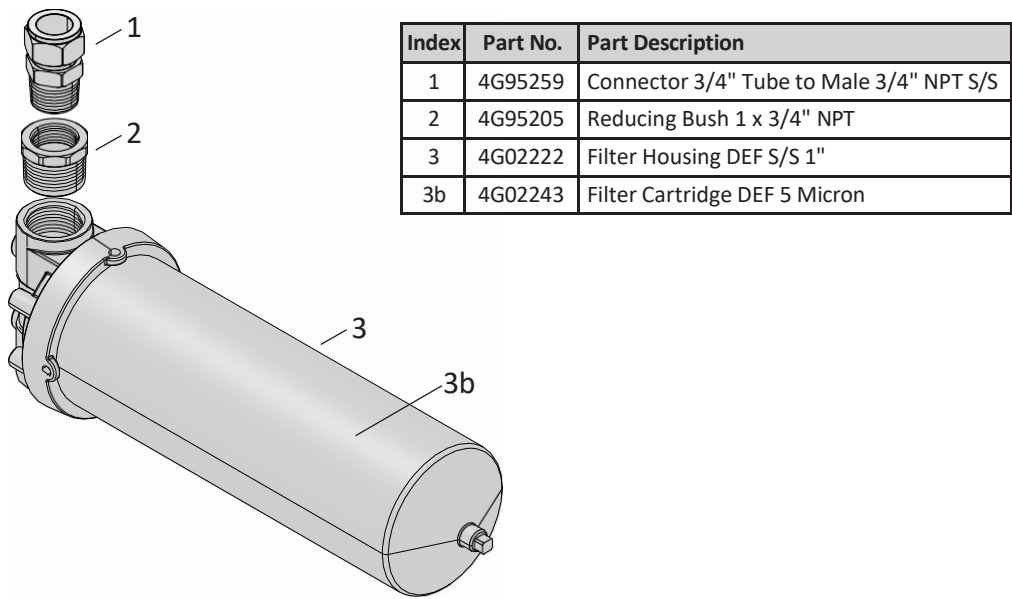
DEF2 Filter Assembly (Part # 2A101005)
